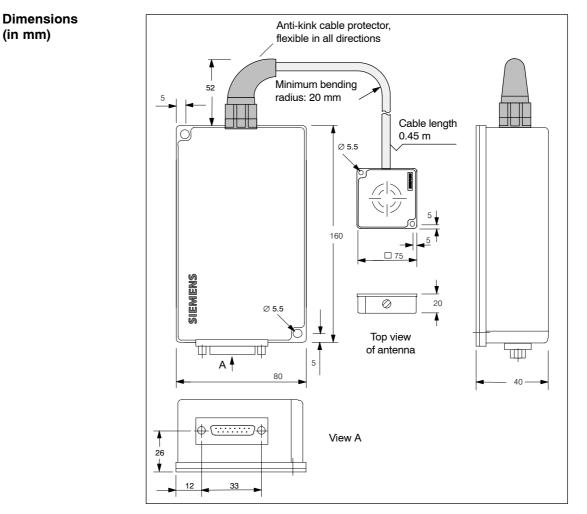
Dimensioned drawing of the SIM 70 ANT 1
